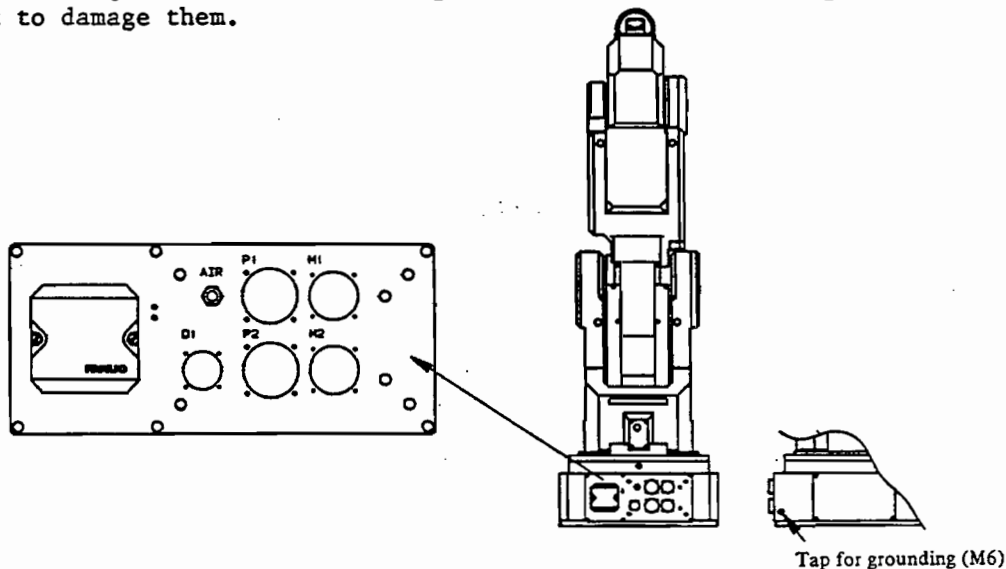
(a) Connector panel of the mechanical unit (S-700)
